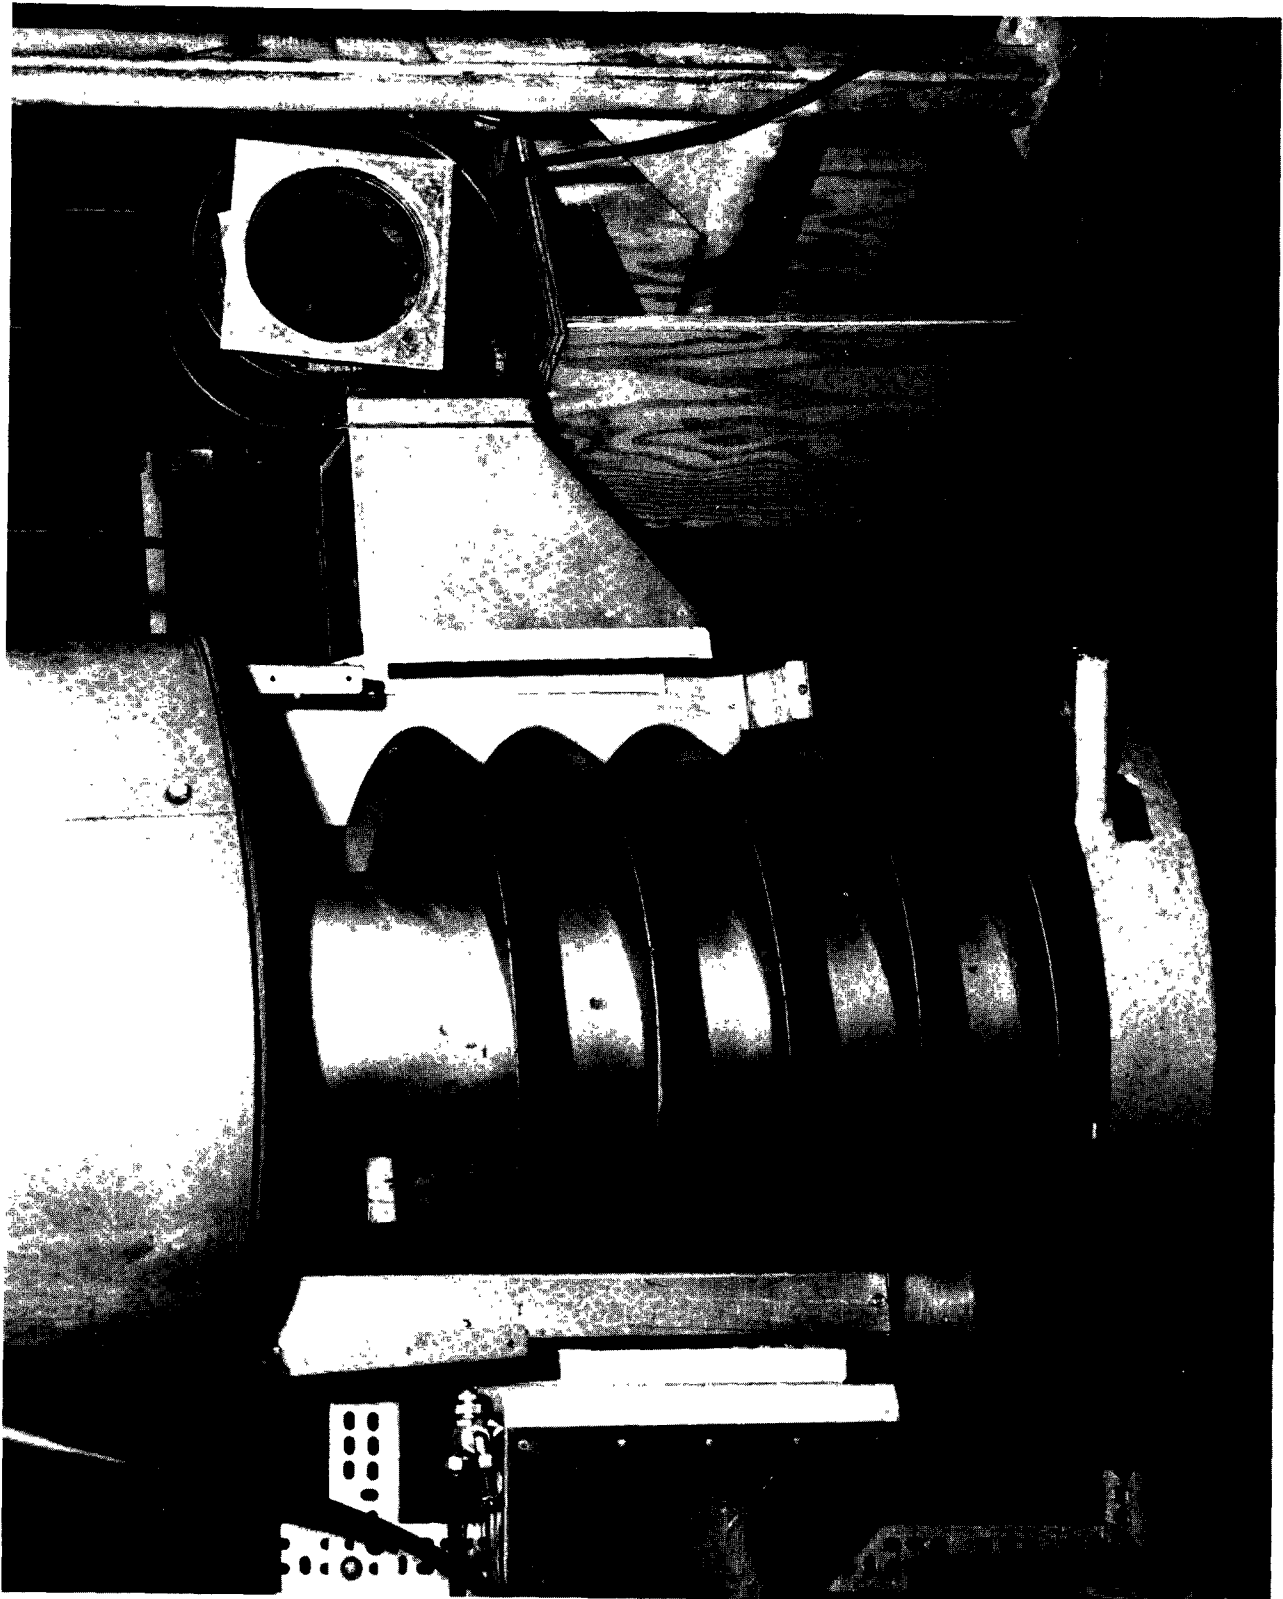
Photograph of Partially Assembled Vibratory Spiral Cooler
